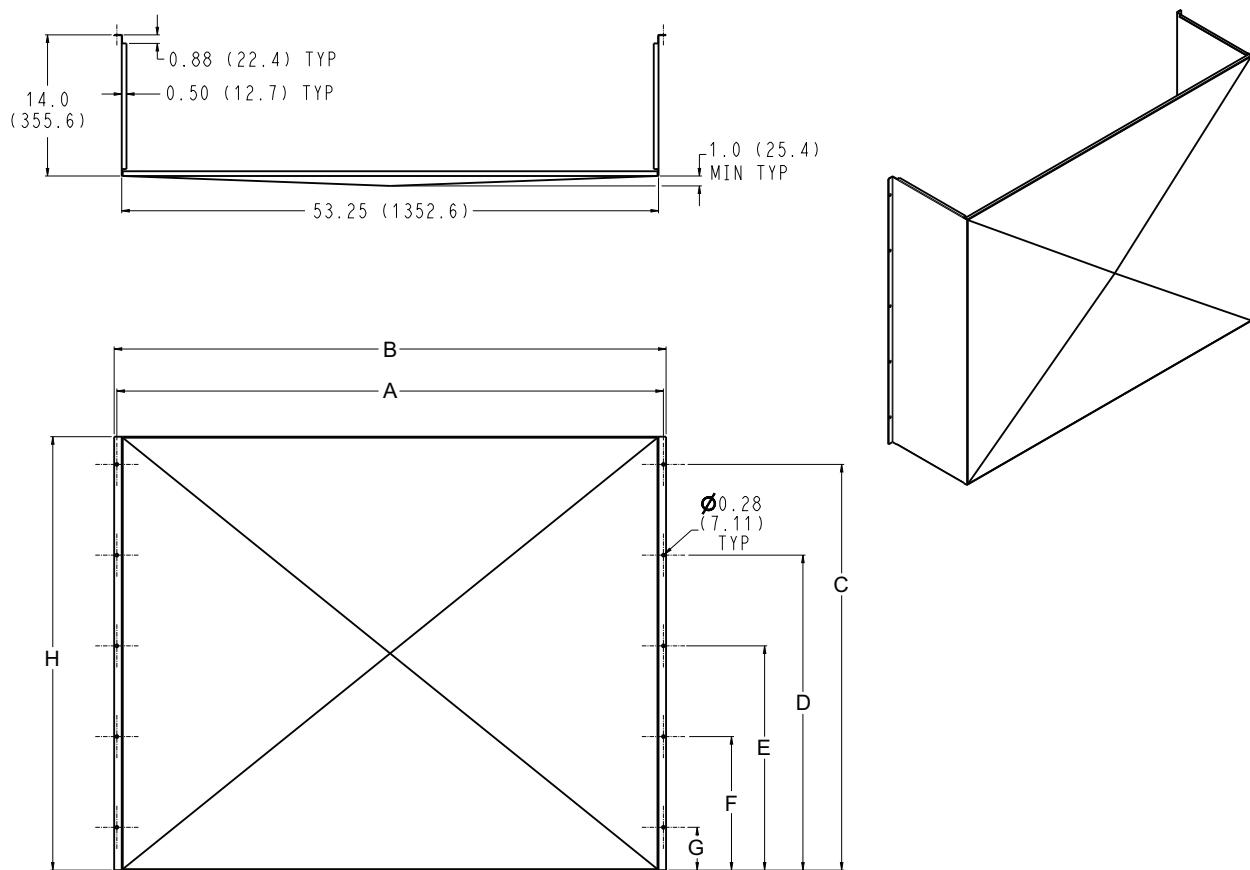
Cabinet C — Side Baffle H (Front/Top View)
